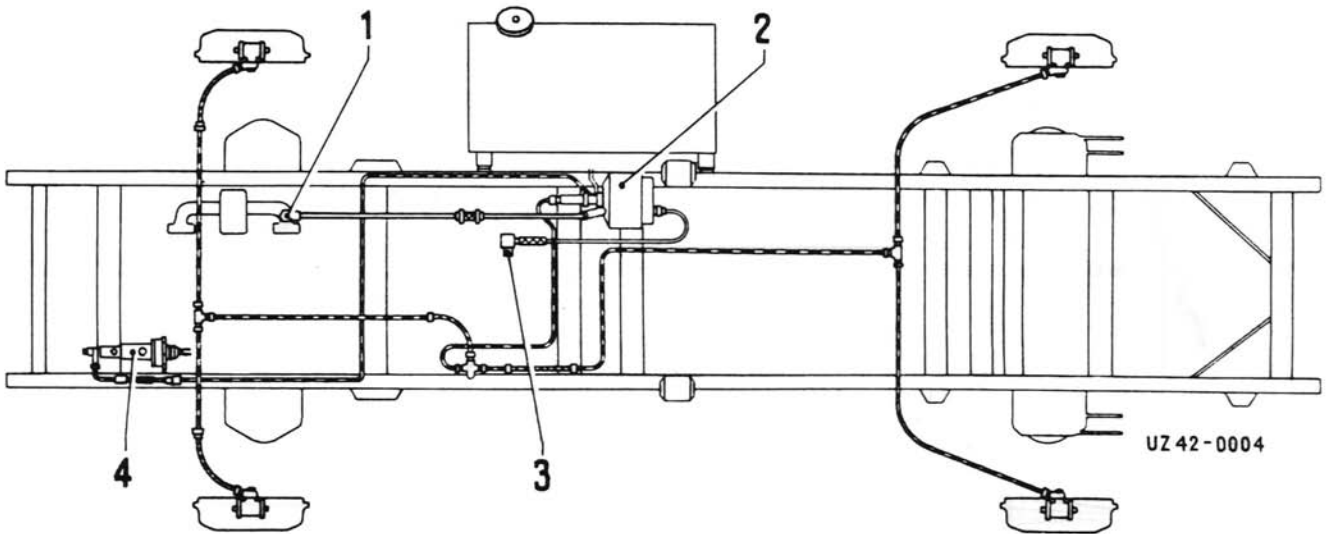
/1 Diagram of hydraulic brake system with vacuum brake support
